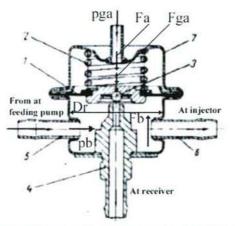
Scheme of pressure regulator: 1-membrane; 2- springs; 3- valve; 4- connection to the tank; 5- entrance connection; 6- exit connection; 7- housing.
